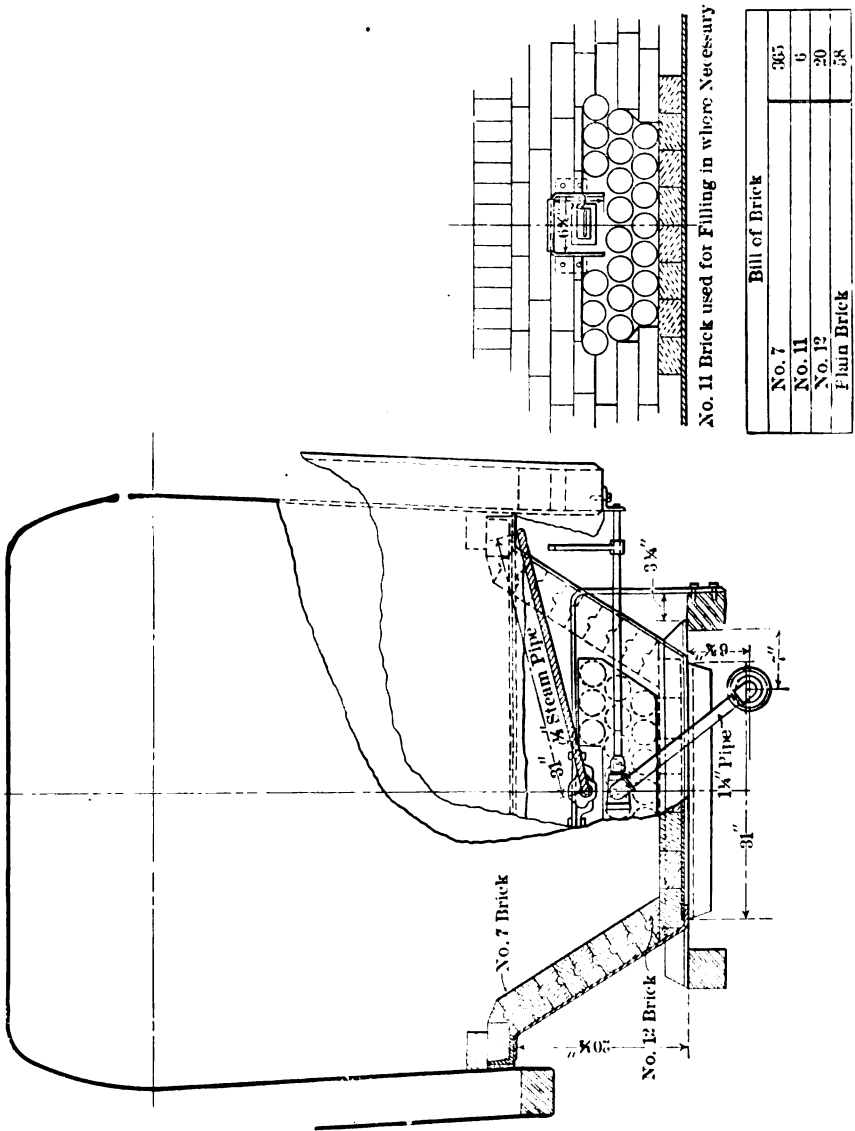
CROSS-SECTION OF LOCOMOTIVE FIREBOX, SHOWING METHOD OF FITTING FOR OIL BURNING
